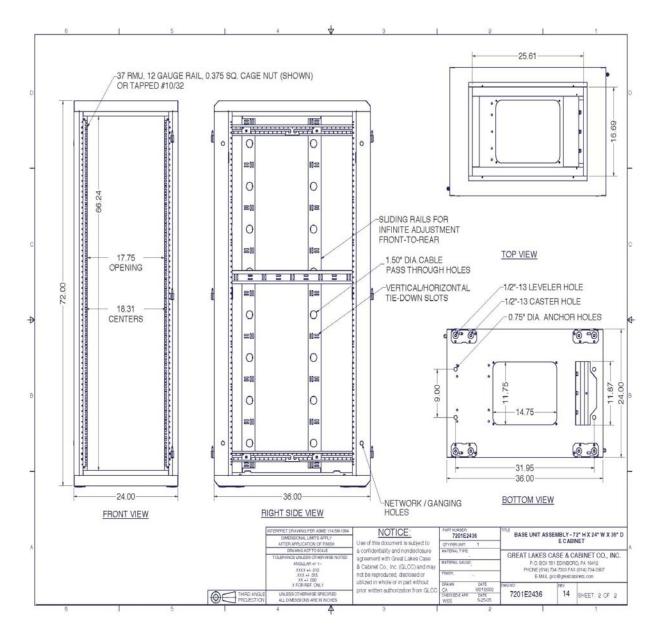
PSAP Equipment Structural Views/anchor holes bottom right corner
